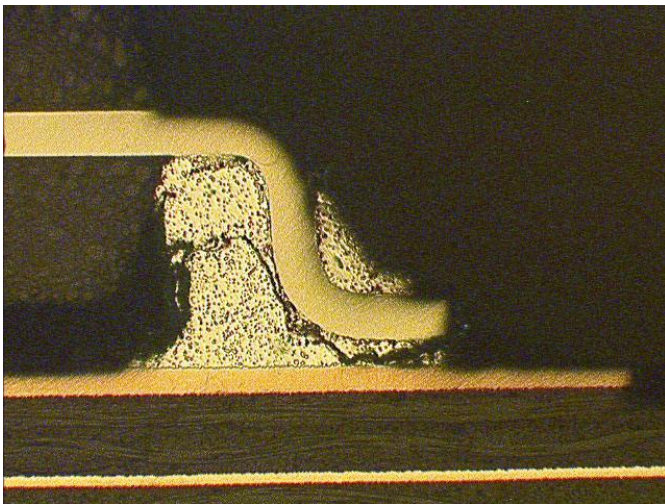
TSOP-50 Solder Joints, Board 44, Component U25, SAC305/SnPb, Failed @ 1787 Cycles
